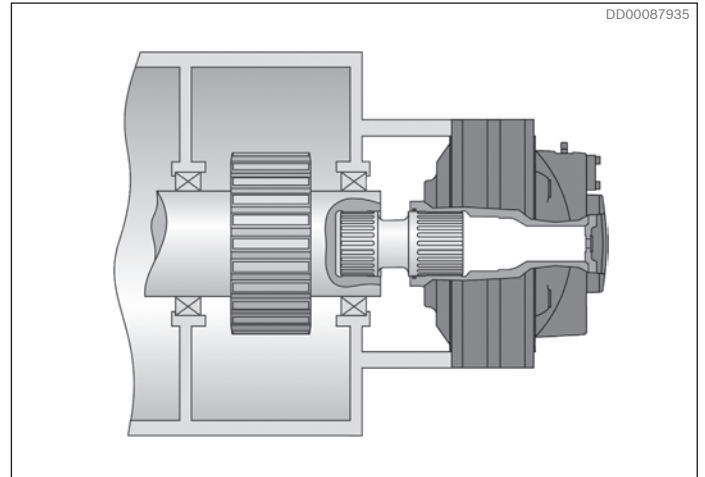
Example: Flange mounted motor with spline to avoid high radial load from driven shaft.
